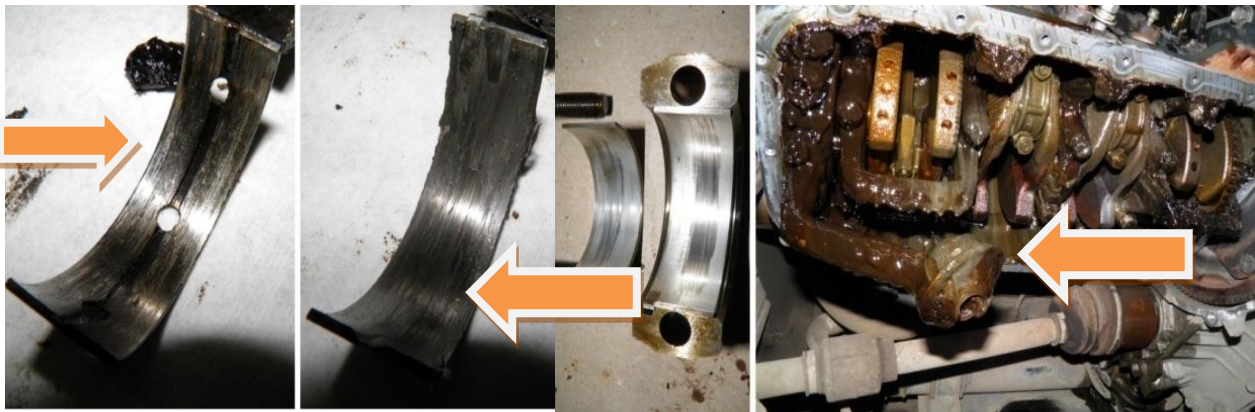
Damage to the main bearings through scuffing, melting, jamming in the cylinder block (left). It was accompanied by relatively minor damage to the conrod bearings (center)
